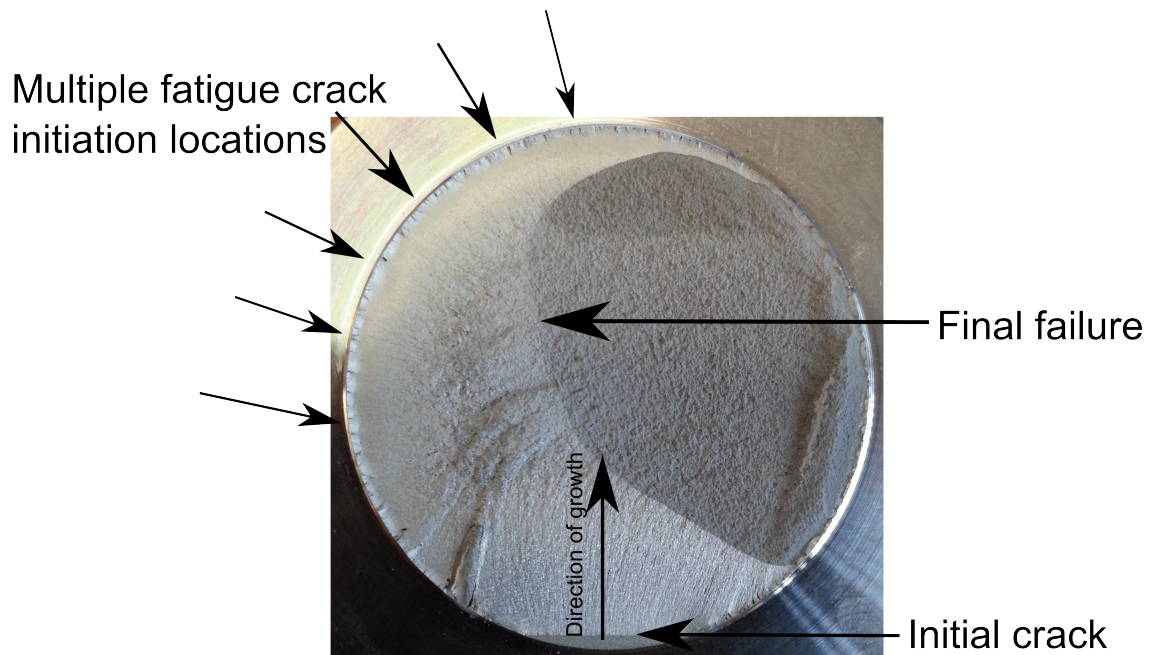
Overview of the fracture surface of specimen 1Z06 where multiple fatigue cracks initiated.
